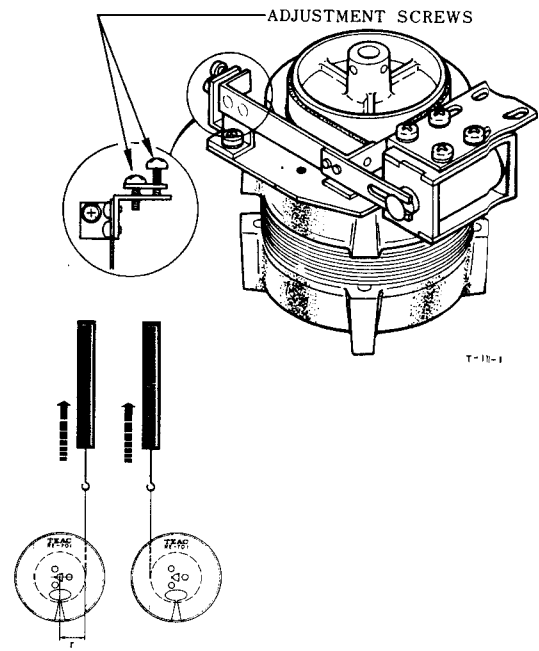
Brake Torque Measurement and Adjustment Location
